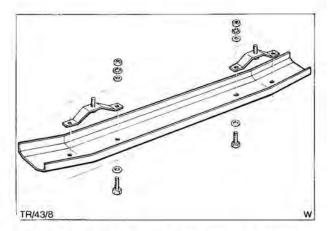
Front bumper mounting bracket assembly to bumper bar
